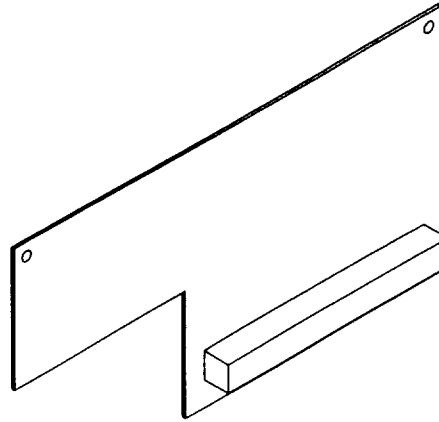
Backplane Jumpers Used with J-4819/G ICD D (Sheet 1 of 2)
